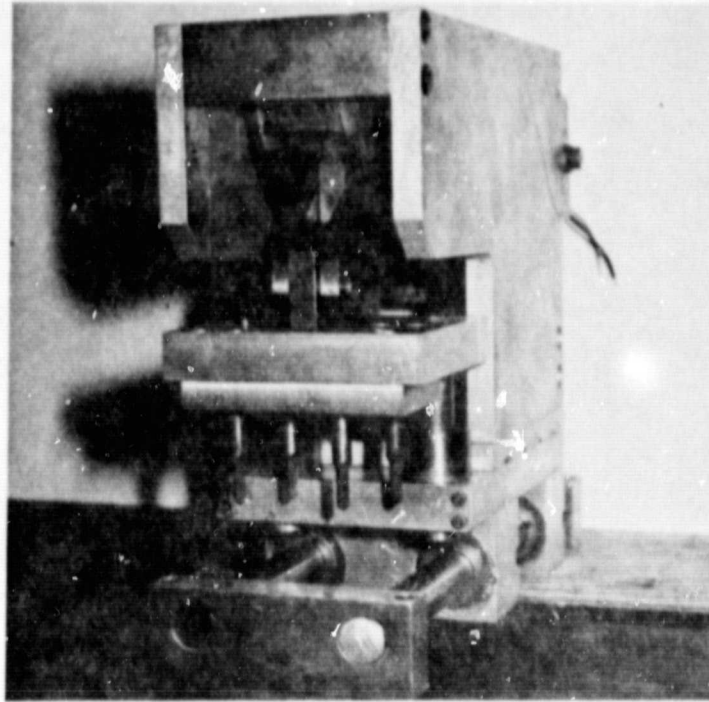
Test Model of Pierce-and-Fold Station for the MSFC Beam Builder.
